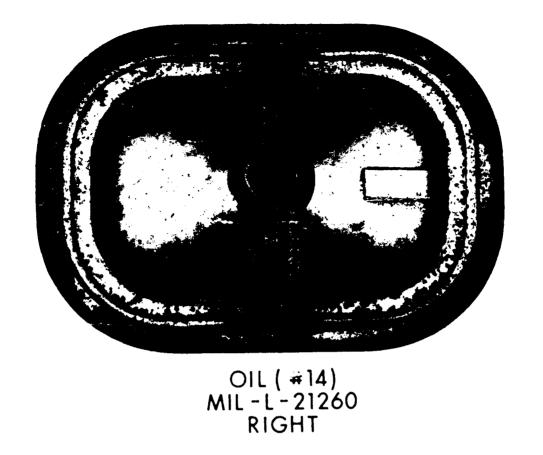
V-53T Engine Parts After 1-, 2-, and 3-Year Storage 1-Year Storage
